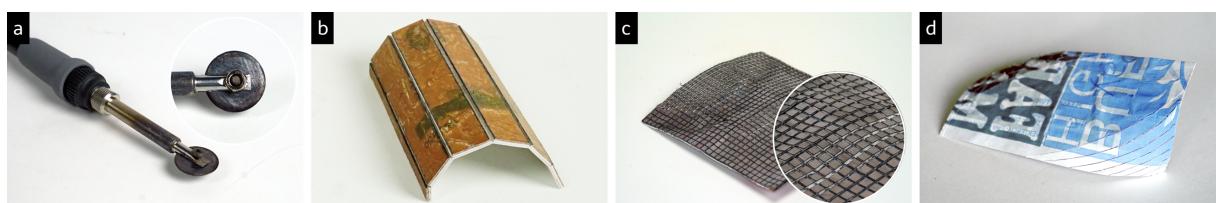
(a) The custom rolling heat knife consists of a modified (cut through the middle) soldering tip that houses a circular blade held in place with a nut and bolt. Different ways of scoring
